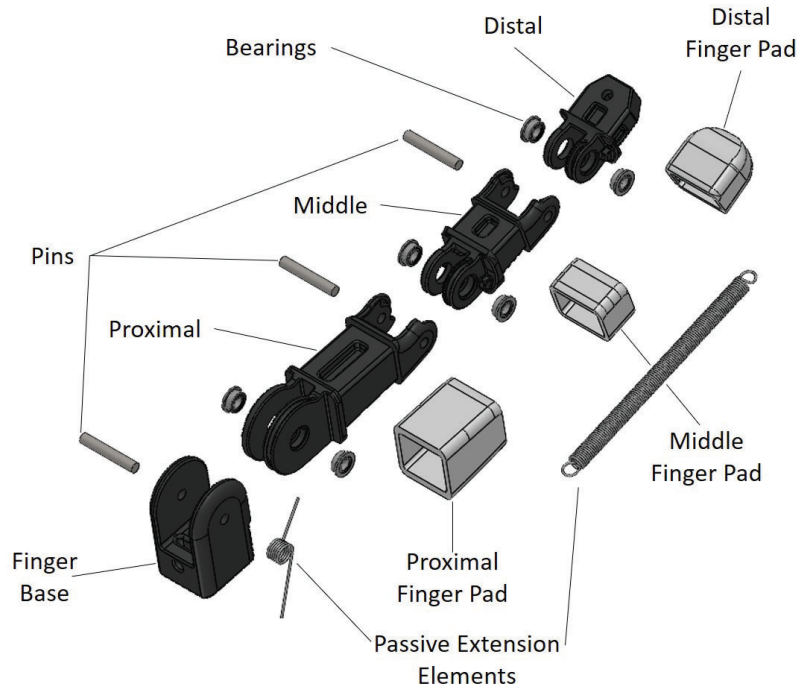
An exploded view of one instance of the tendon driven, passive extension, modular finger unit. The design consists of a proximal, middle, and distal phalanx. Integrated miniature bearings and replaceable silicone finger pads are used to reduce friction and provide increased grip.
